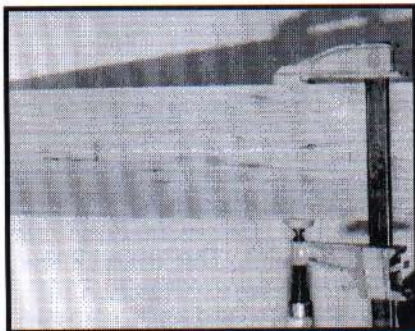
The clamped joint should have a bit less glue squeeze-out than this
